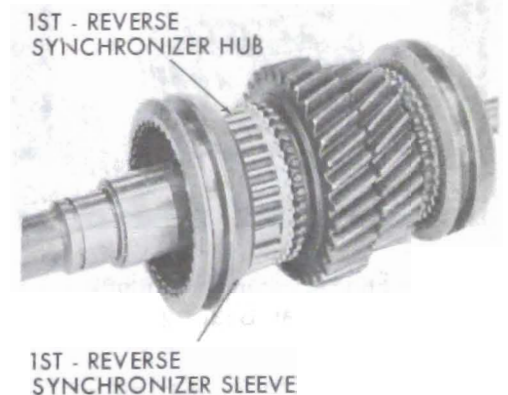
Installing First and Reverse Synchronizer Assembly
